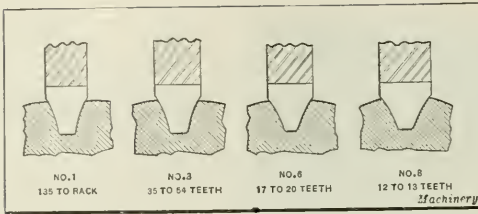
Diagram showing Variations in Shapes of Gear-cutters of the Same Pitch but intended for Small, Medium, and Large Gears
